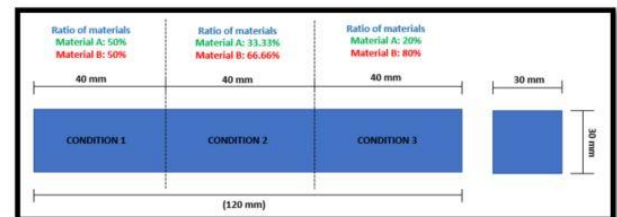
Example of FGM component to be printed using proposed FGM machine
